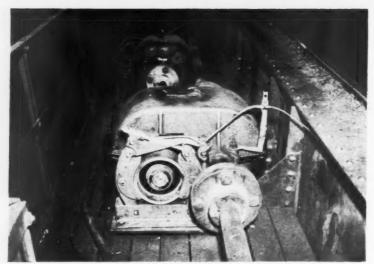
BRAKE UNIT keyed to the gear box of the bridge drive motor on an overhead traveling crane. Hydraulic line goes to master cylinder pedal in cab.
